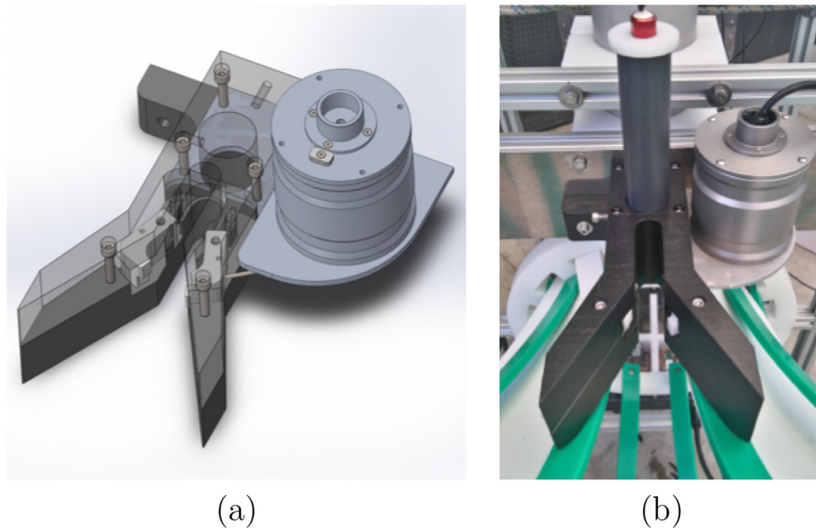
(a) CAD model of the latching mechanism and (b) picture of the real latching mechanism.
